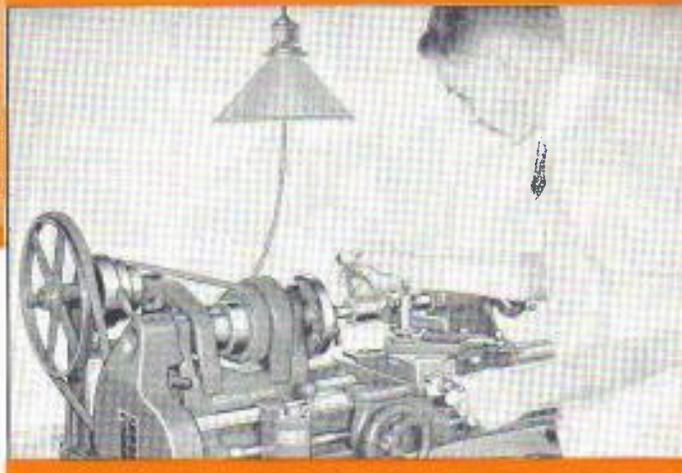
Making a Replacement Bushing in the 9-inch "Workshop" South Bend Precision Lathe.
